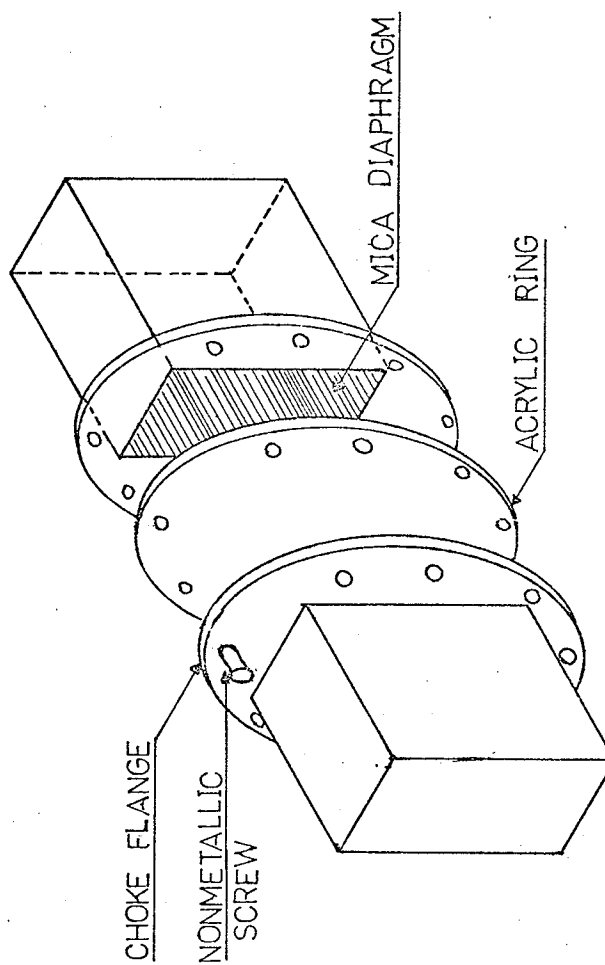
Isometric view of the segment AA of the complete assembly.
